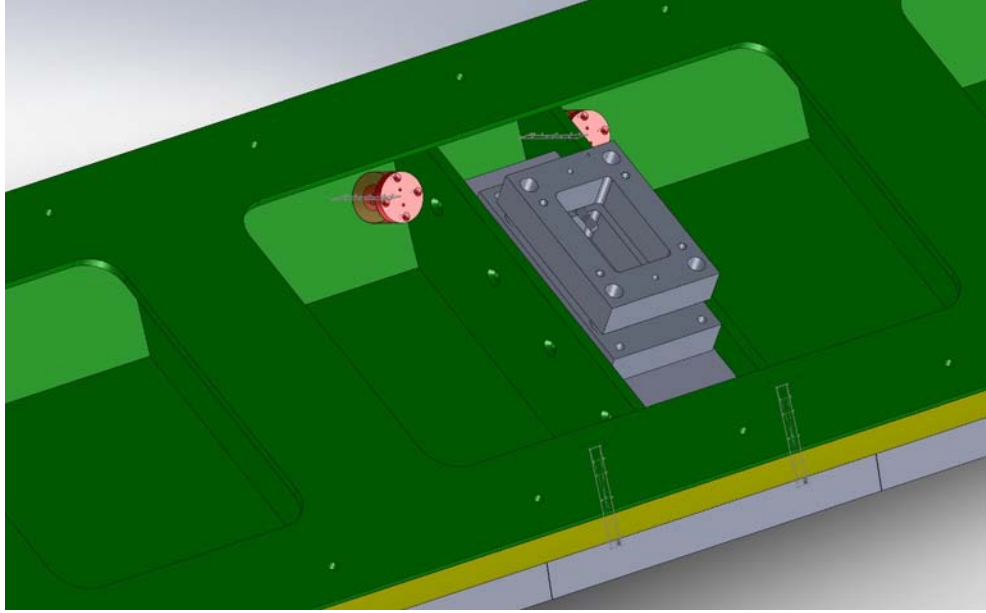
Illustration the 2D Model with Kistler gage (gray) and instrumented bilge keel sections (red), with hull penetrations, shown
